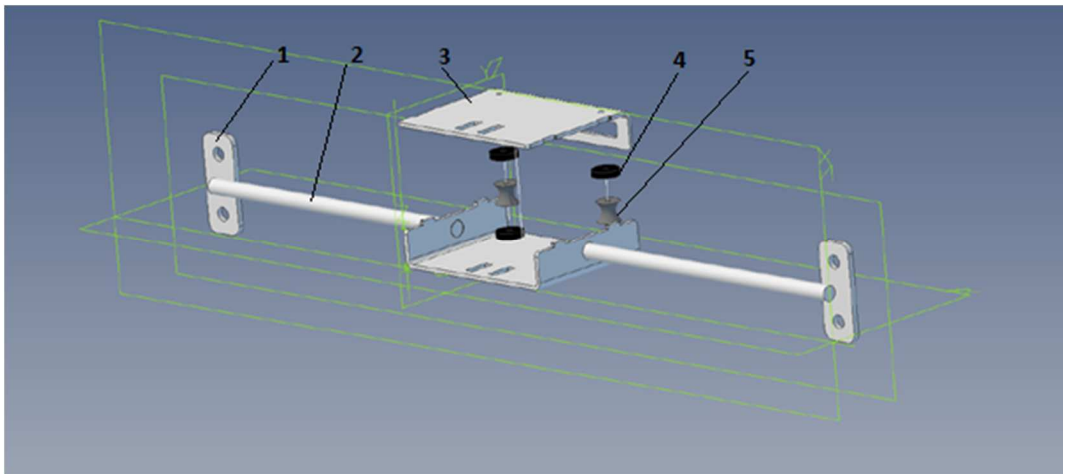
Assembly of maintenance mechanism, where 1-mounting plate, 2- 8mm round bar, 3- assembly for holding sponges or a cleaning cloth, 4- washer, 5- roller.
